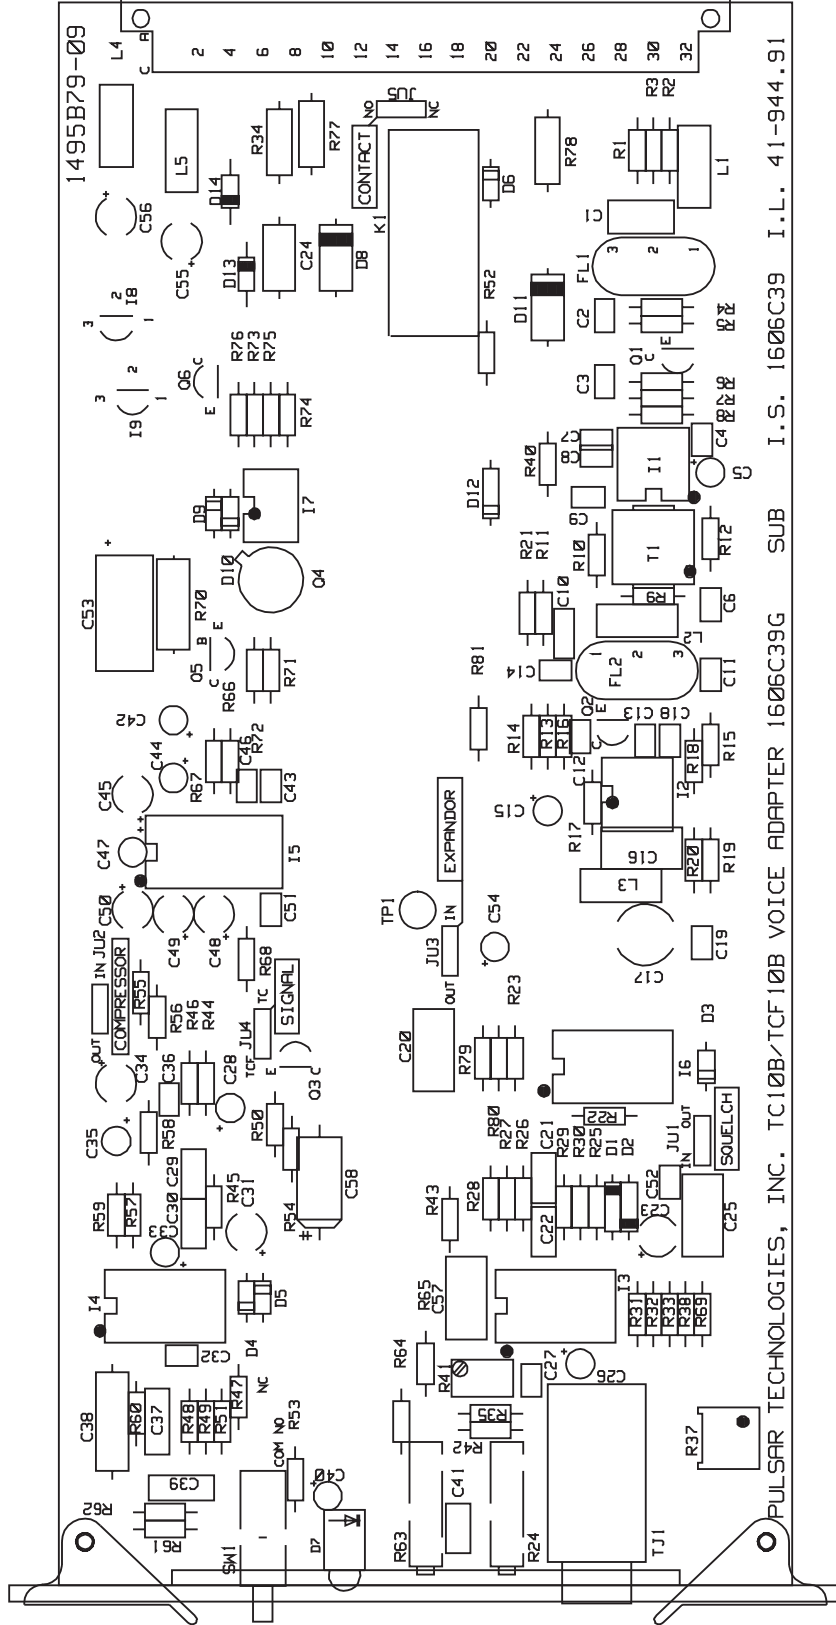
TC-10B/TCF-10B Voice Adapter PC Board (1495B79).
